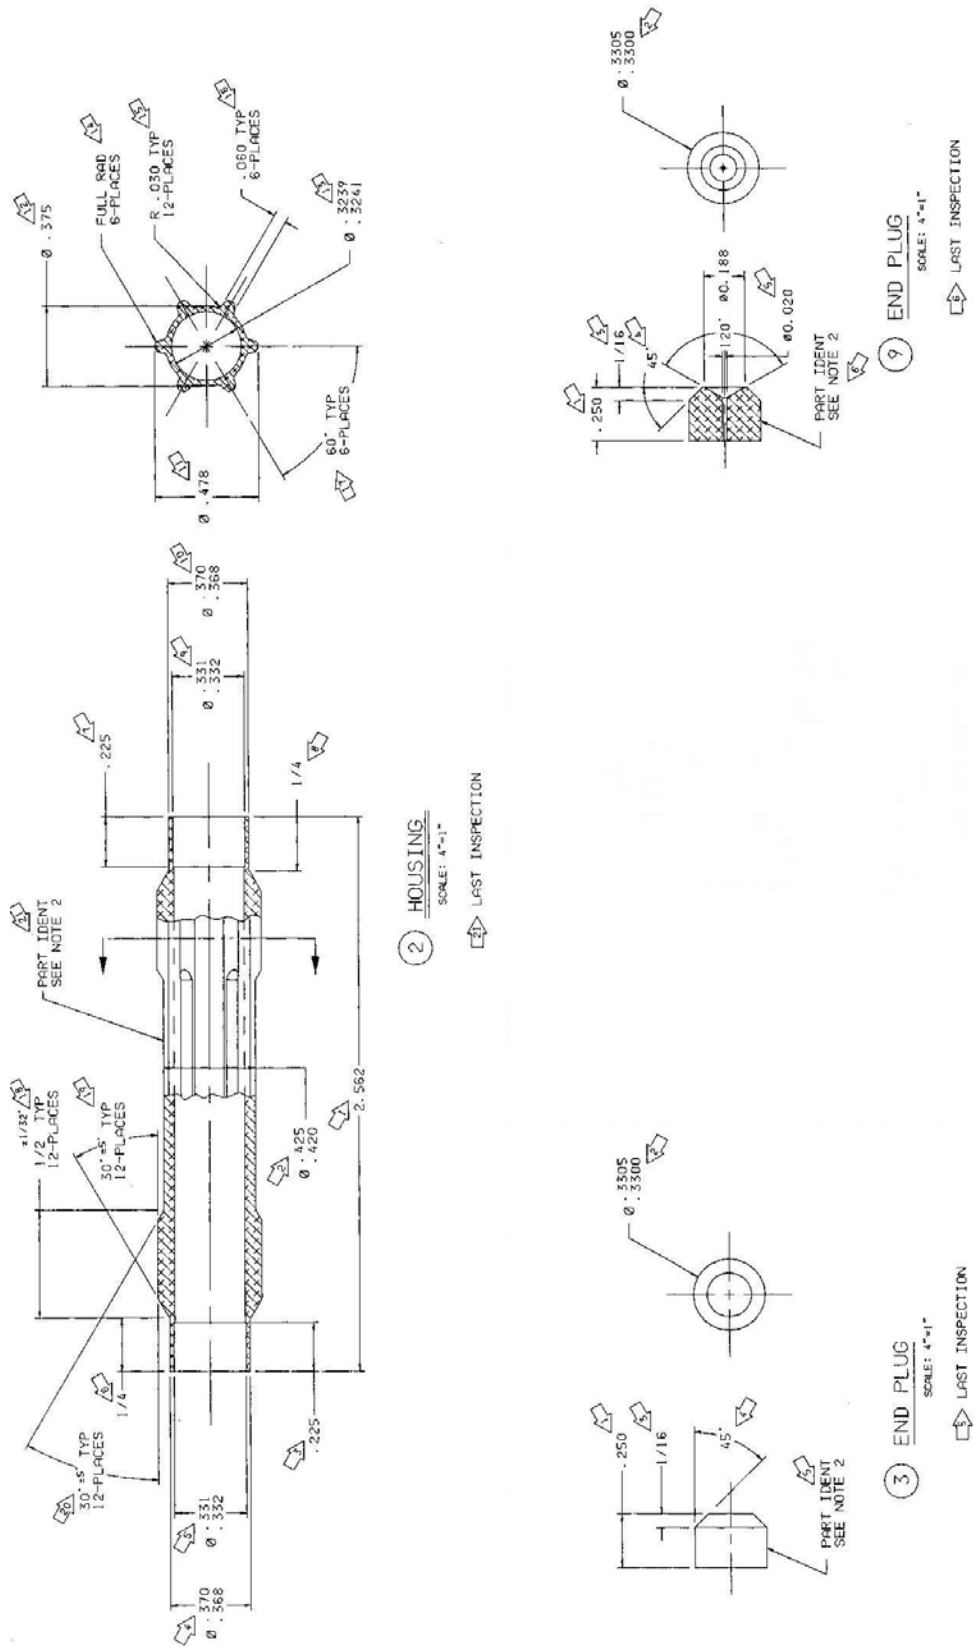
Aluminum Hydraulic Tube Irradiation Capsule
